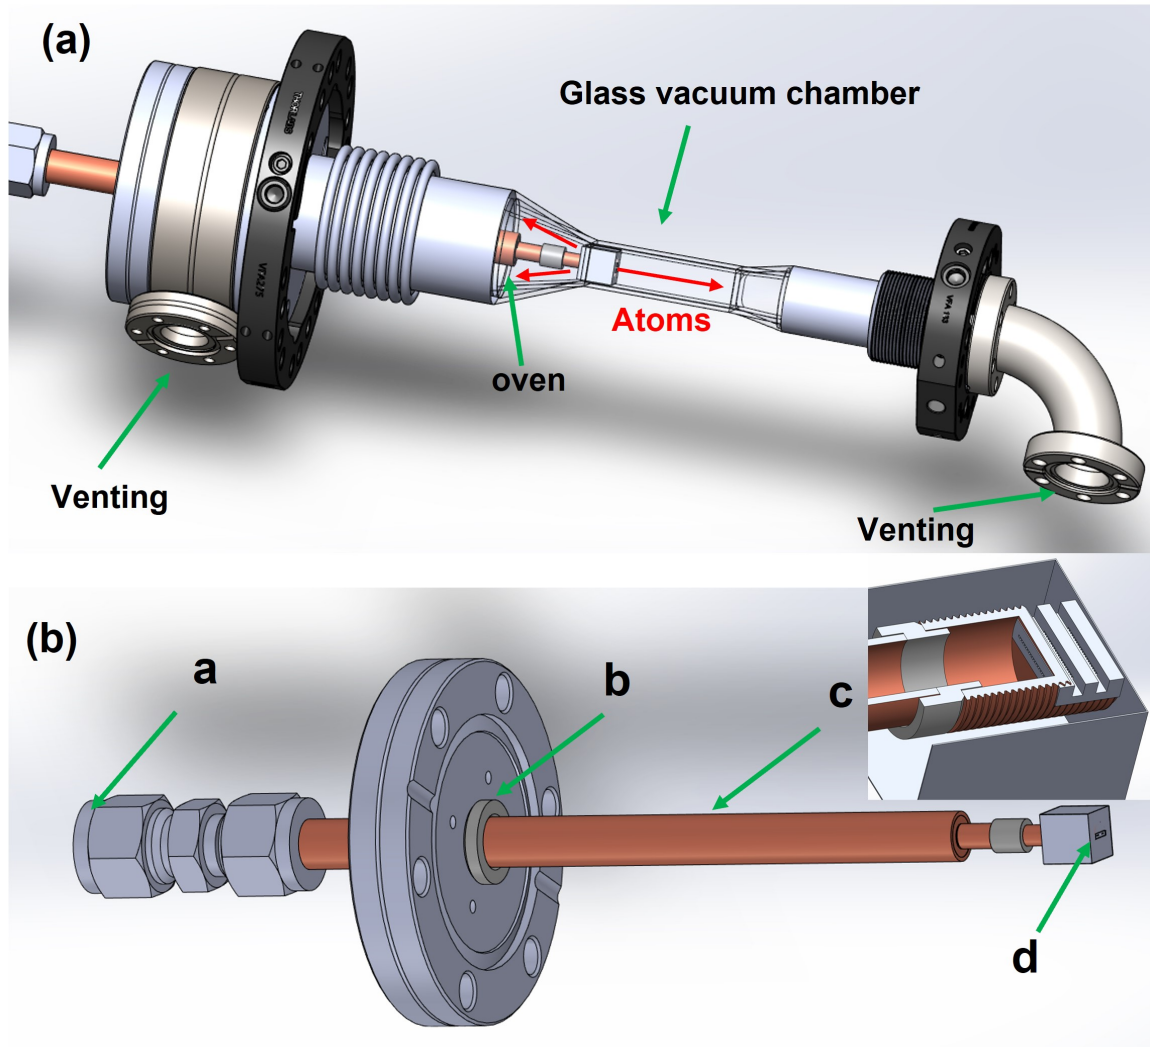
(a) A SolidWorks model of the glass vacuum chamber we used. The main cuboid glass section has great optical access and is attached to vacuum flanges with bellows in between to reduce stress. A custom-made oven is inserted from the left (details see (b)), and atomic beams can propagate through the glass section. Two venting ports on each side are connected to the same pumping station to pump away both the vapor and the beam component. (b) The custom-made atomic oven. Part a is a Swagelok union that can be connected to a copper tube containing the rubidium ampoule. Part b is a 2.75" CF flange with feedthroughs. A thermal breaker is added between the copper tube and the flange to keep a temperature gradient. Part c is a long copper tube for delivering the rubidium vapor. Its in-vacuum section is wrapped with a Kapton heating film. Part d has the adapter for our silicon cascaded collimator. The inset shows a cutaway diagram of part d with our cascaded collimator.
